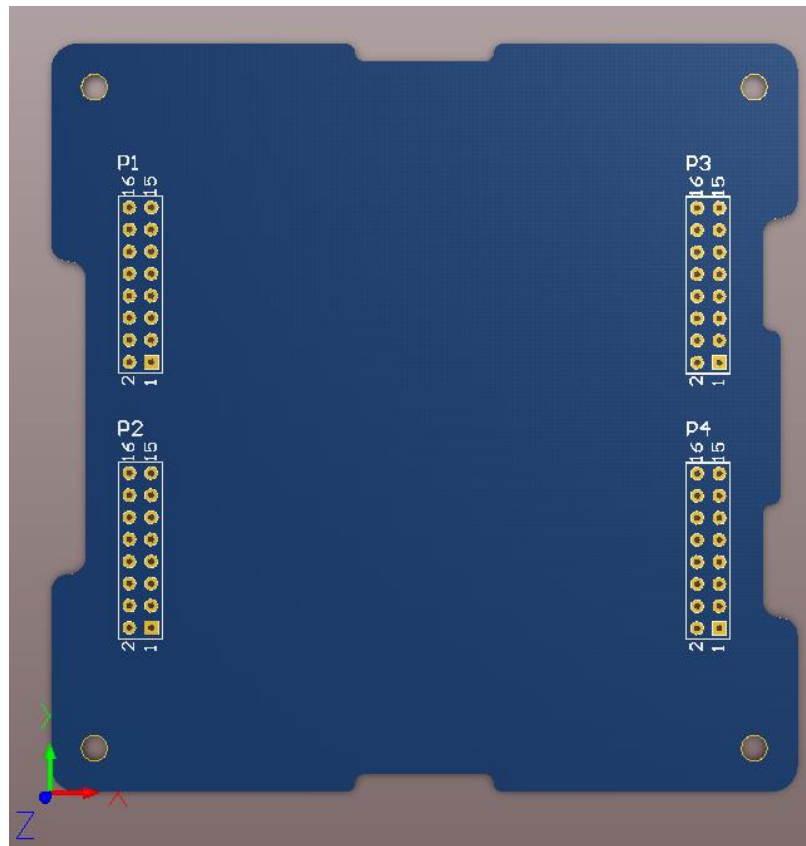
Base layout of the PCB Standard. Design by M. Cocca
